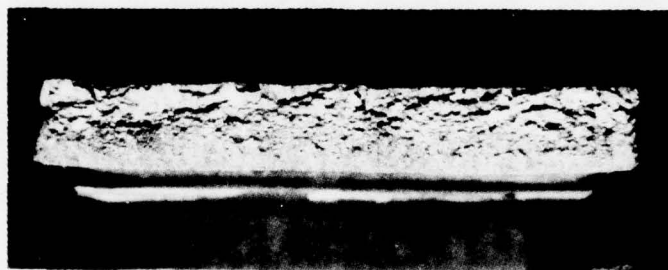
FRACTURE INTERFACE OF PRE-FORM TUBE S/N 6 AFTER BONDING CONDITION. MAG. 3X.
